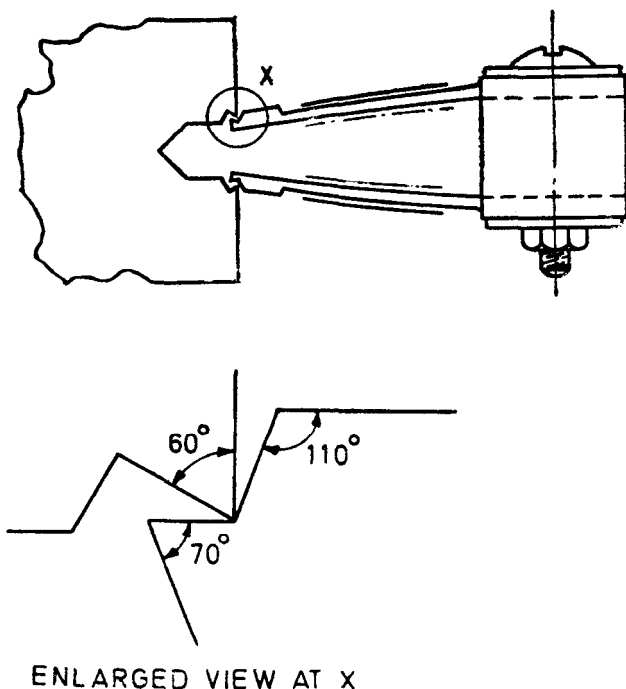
ATTACHMENT OF GAUGE BETWEEN MACHINED KNIFE EDGES
